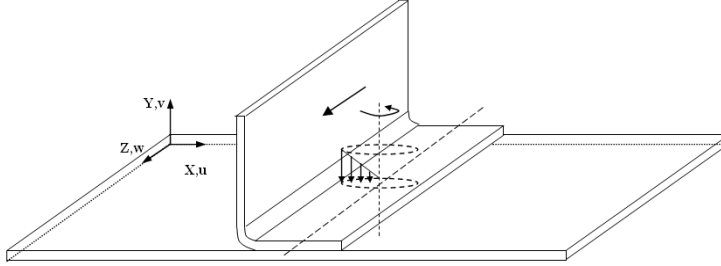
Model-2: the friction stir welding of an L-shaped stringer on a plate
